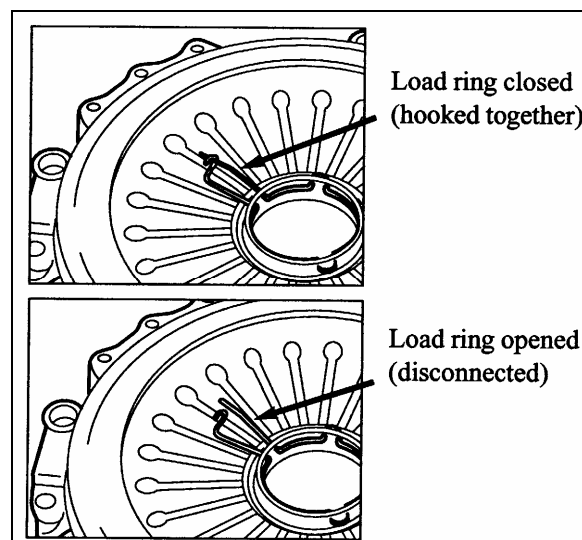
RELEASE BEARING RETAINING CLIP 07081
